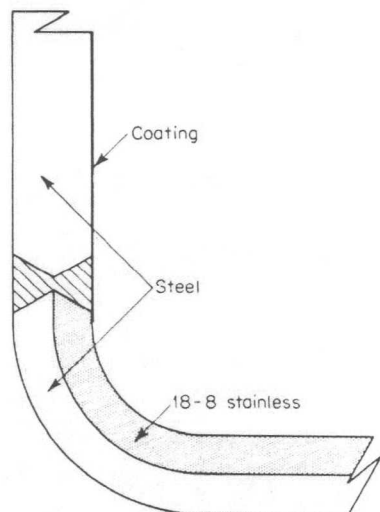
Detail of welded steel and stainless clad tank construction.
